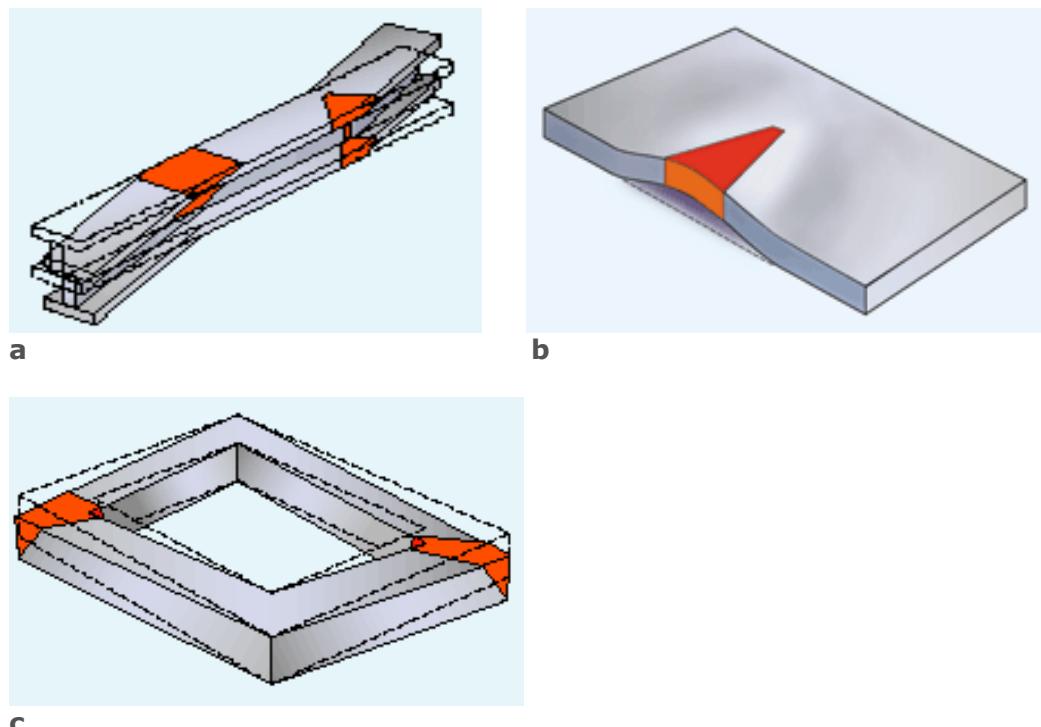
Use of wedge-shaped heating to straighten plate.
